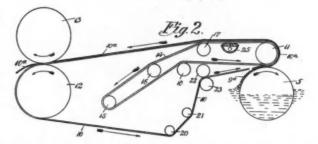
is a diagrammatic view disclosing the arrangement of the belt and of the rollers.
